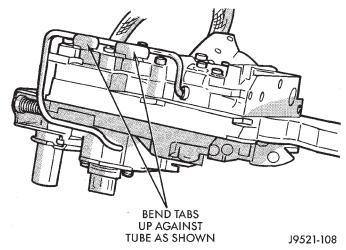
Securing Boost Valve Tube With Brace Tabs
